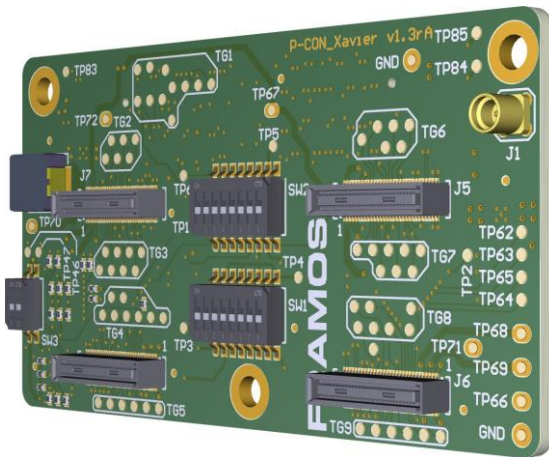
Technical Drawing of FSA-FTx/BC-V1
